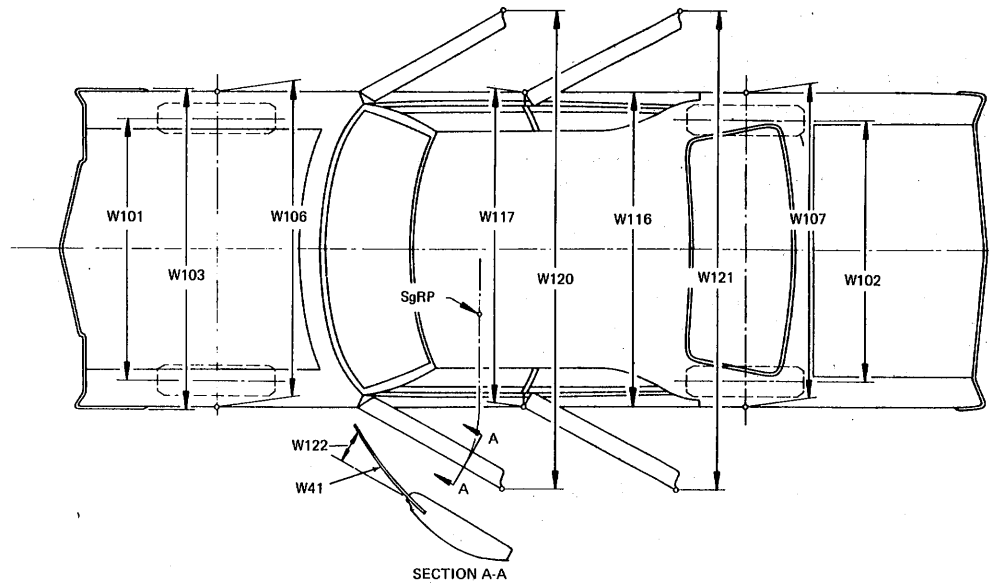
EXTERIOR DIMENSIONS, WIDTH
